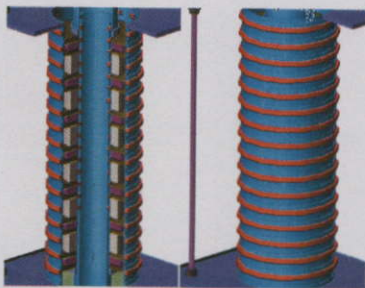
Cross section and isometric view of the permanent magnet linear generator.
